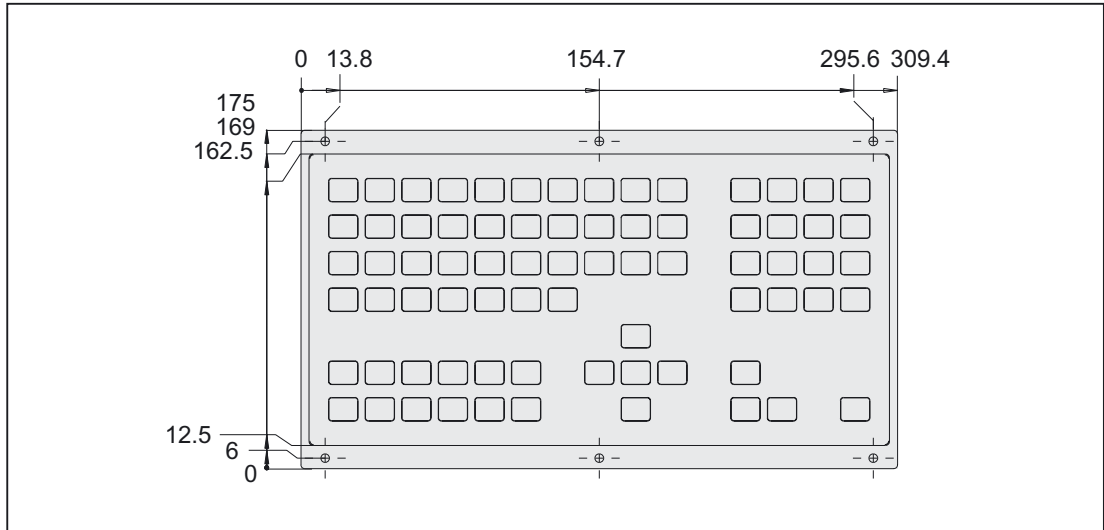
Dimension drawing of full CNC keyboard OP 032S
